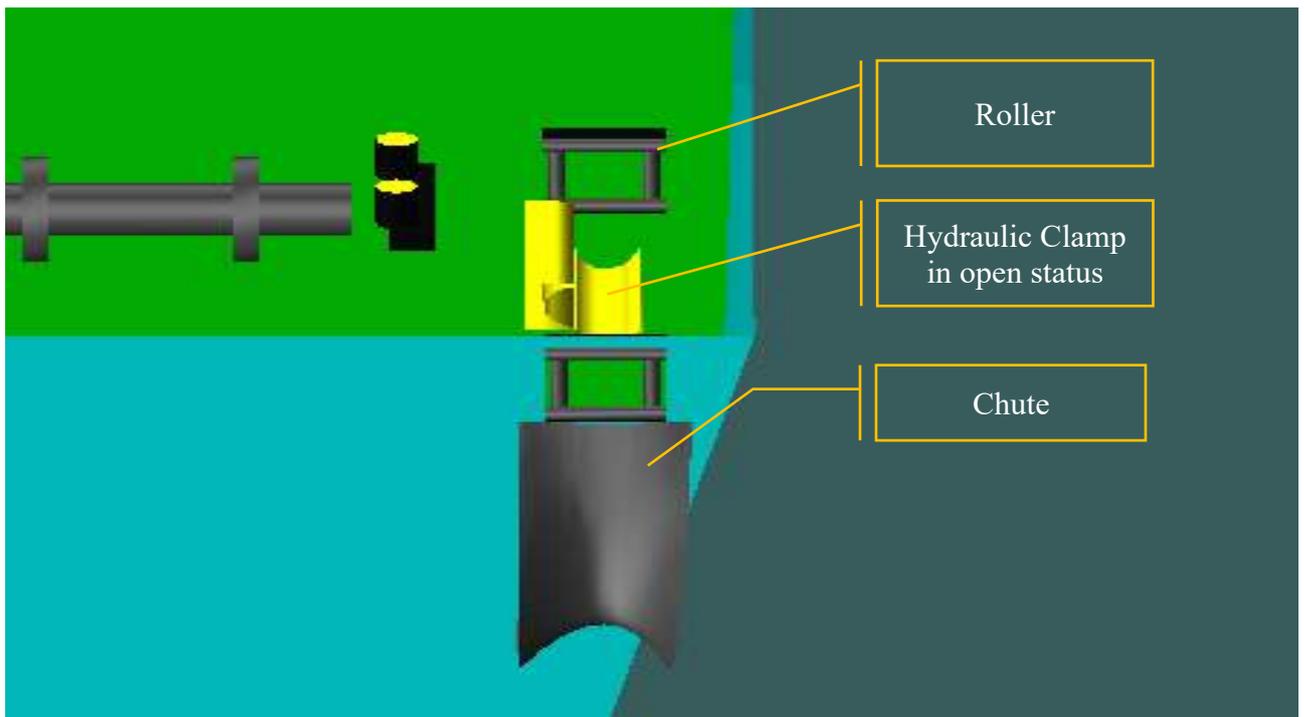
Chute, Hydraulic Clamp and Rollers
